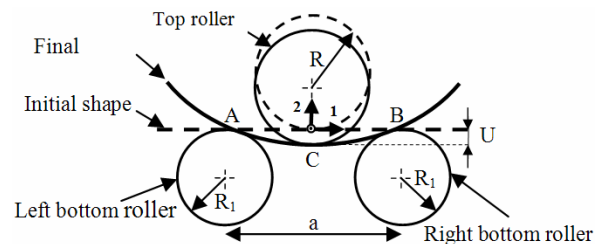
Configuration of a pyramidal three-roller bending machine.
